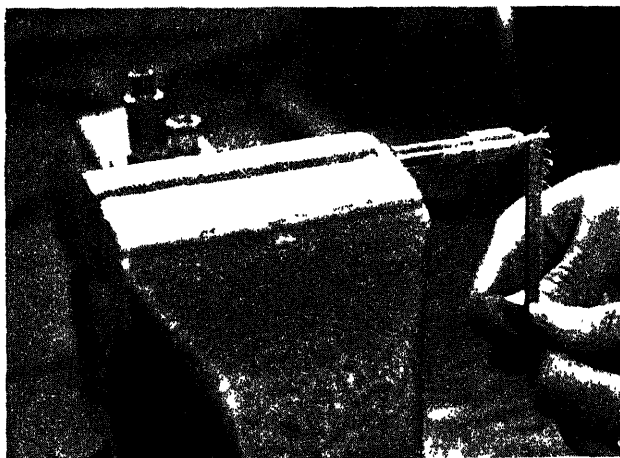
25-HOUR ROUTINE INSPECTION (3)
